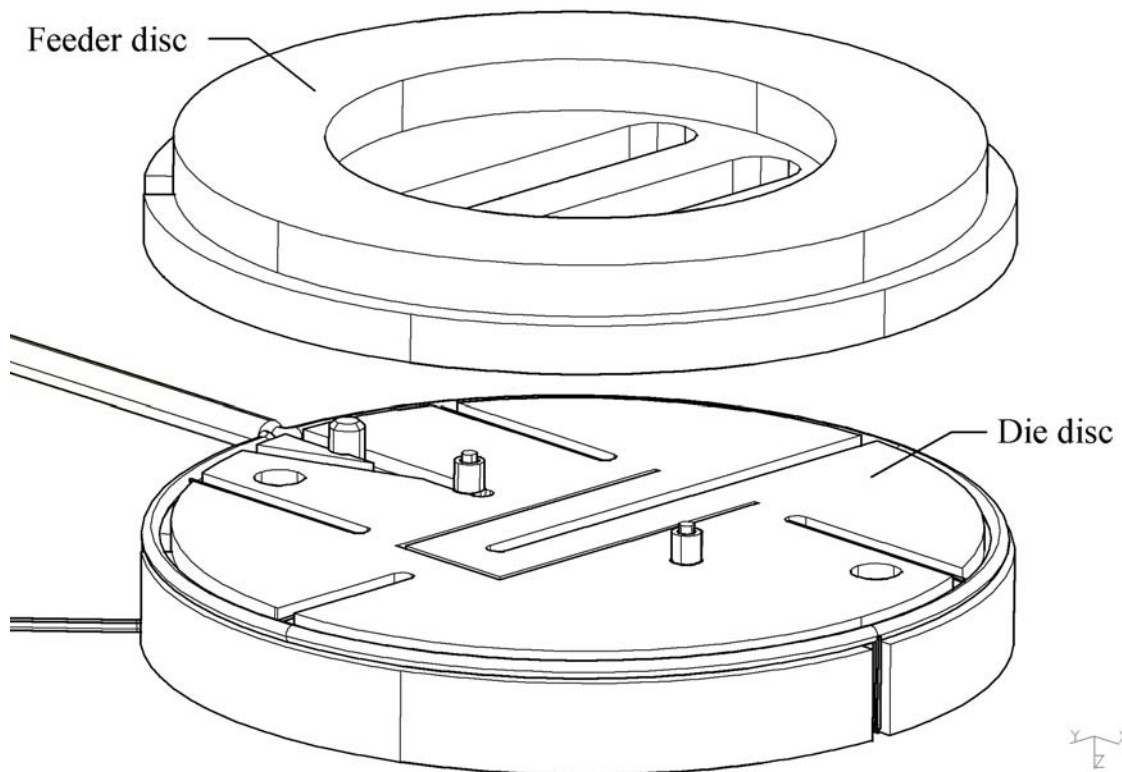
A view of the upper faces of the die disc and feeder discs with sensors used during industrial experiments. Slots for thermocouples may be observed.
